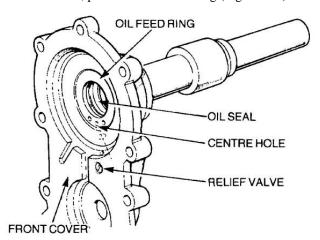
Installation of the Oil Feed Ring and Relief Valve
